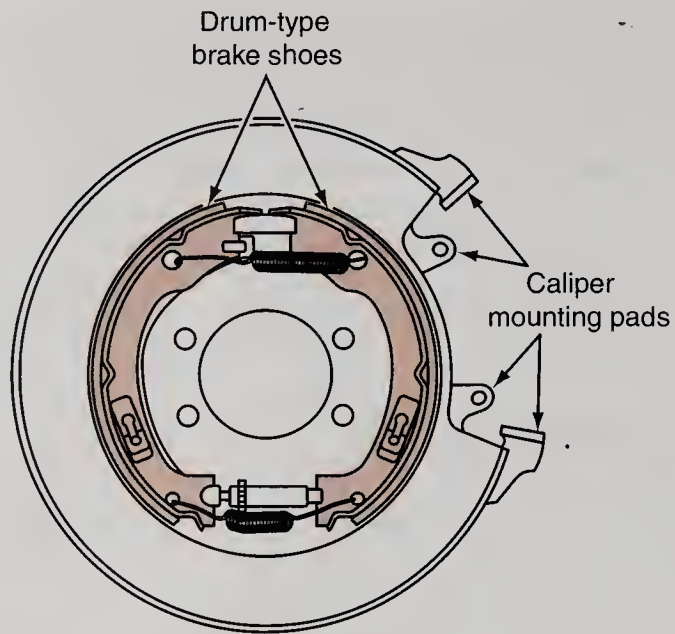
Shown is the shoe-type parking brake used with some rear disc brake systems. The actual size is not much larger than the size shown.
